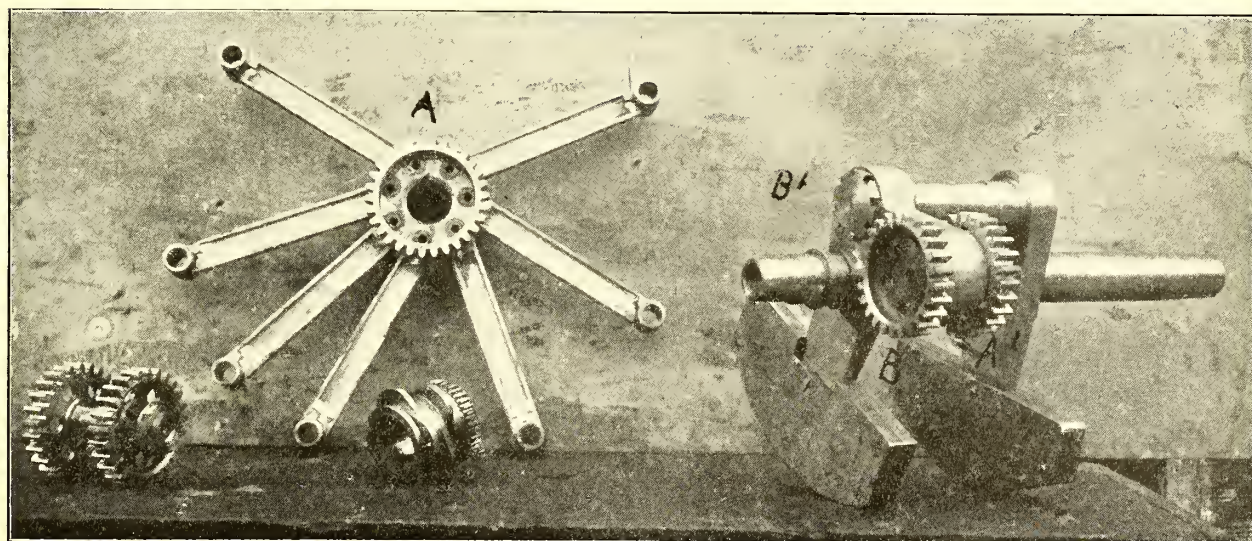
Fig. IV., showing crankshaft and big-end arrangement of the Salmson Engine.
